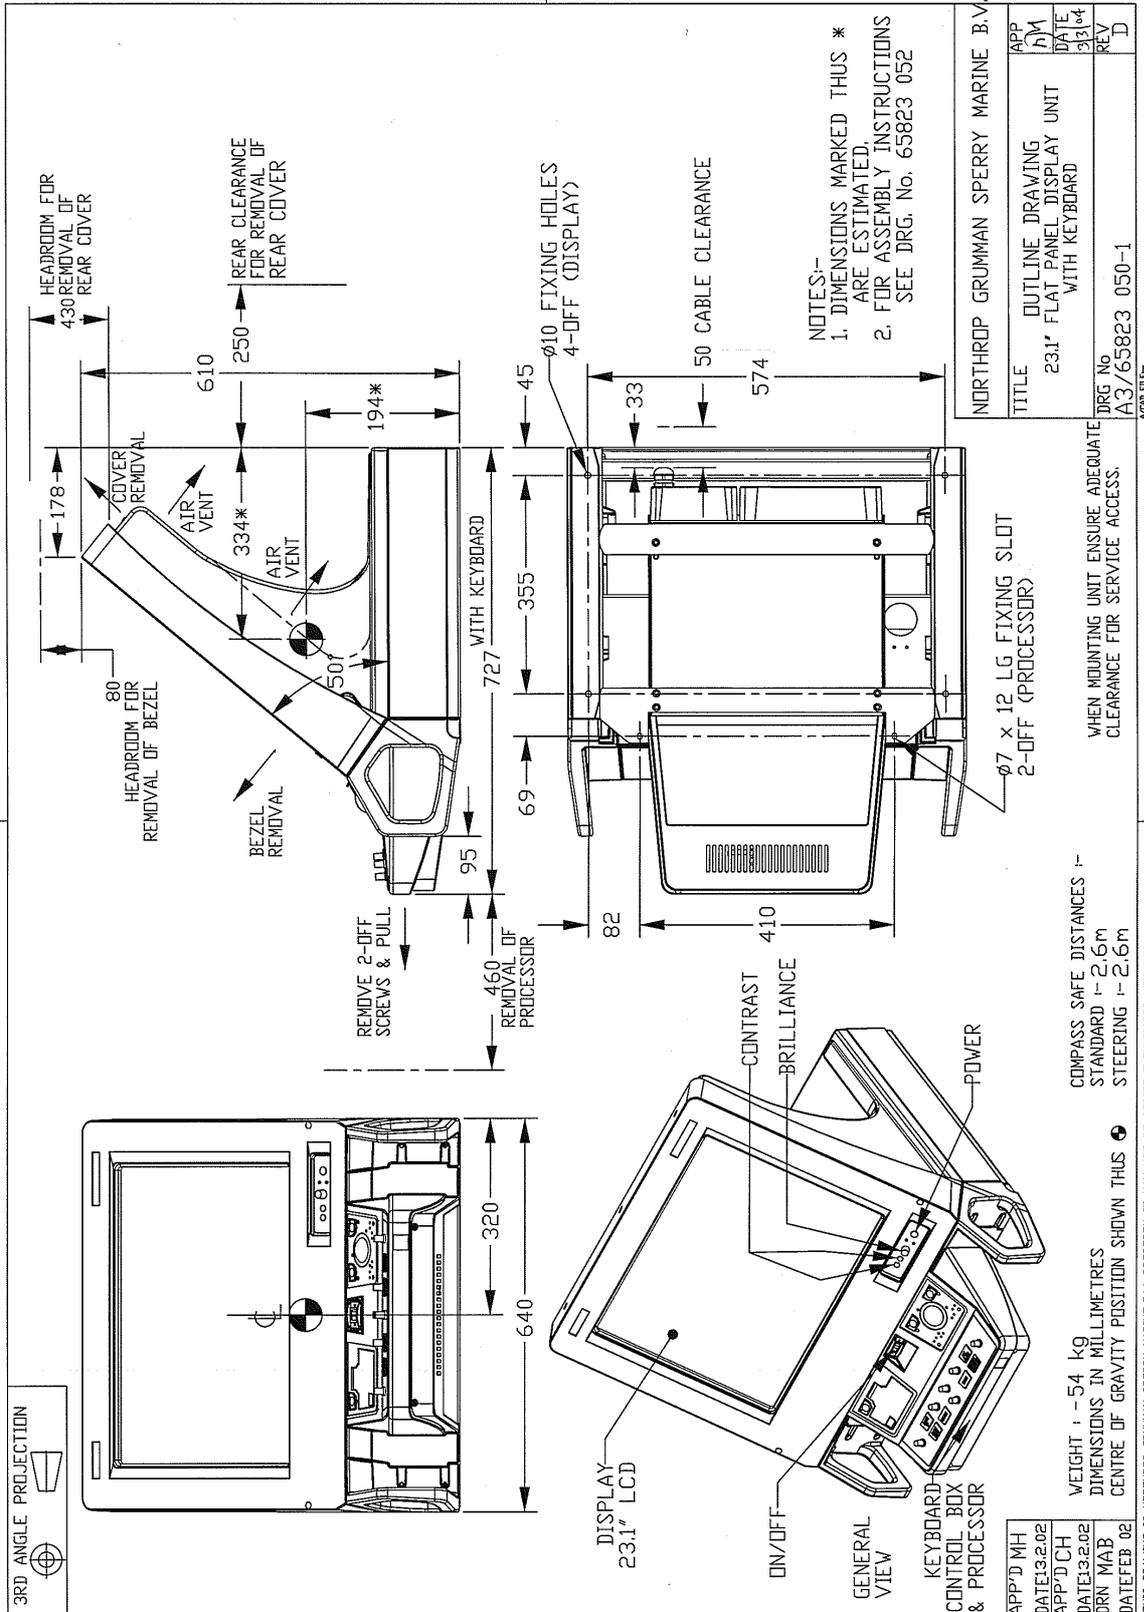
340 Display Unit (FPD) Outline Drawing
